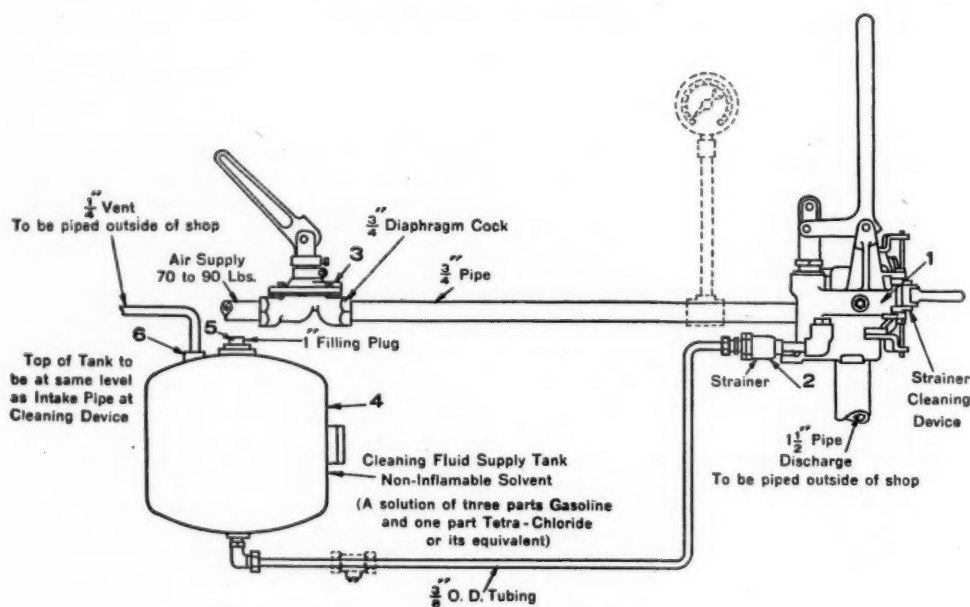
Arrangement of Cleaning Device for AB Brake Valve Strainers
